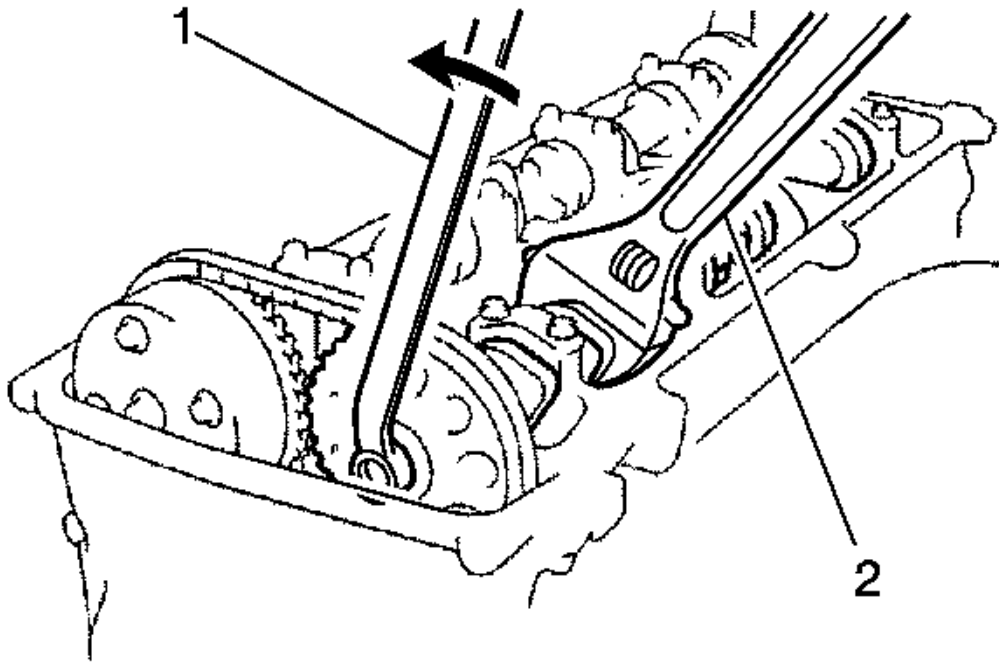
Identifying Camshaft Timing Gear & Sprocket
